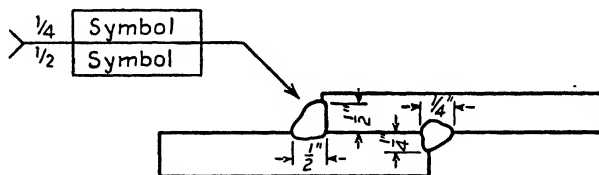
The size of the weld is then shown by dimensions in the proper relation to the base line. (Dimensions on welds as given on this structure are only to show what the symbol indicates and would not otherwise be used.)
